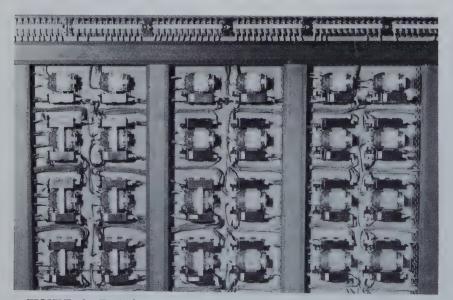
Typical custom - built motor control construction at Cutler-Hammer utilizes front removable components and troughs for the panel wiring.
